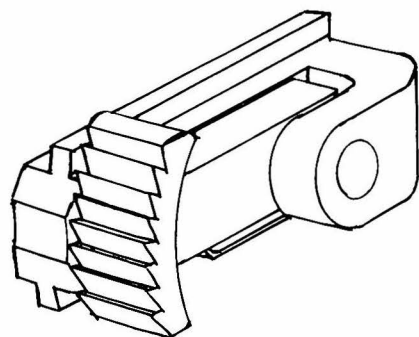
SELF-HOLDING SLIDING-WEDGE CHUCK JAW.
